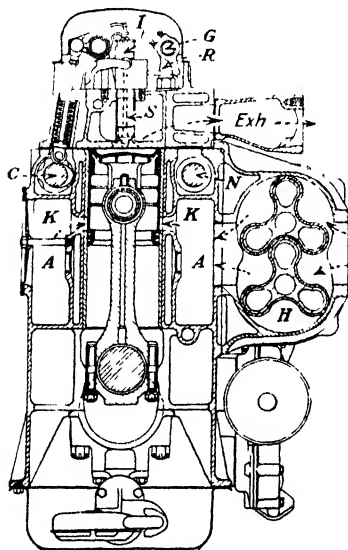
General Motors two-stroke, uniflow, Diesel engine.
